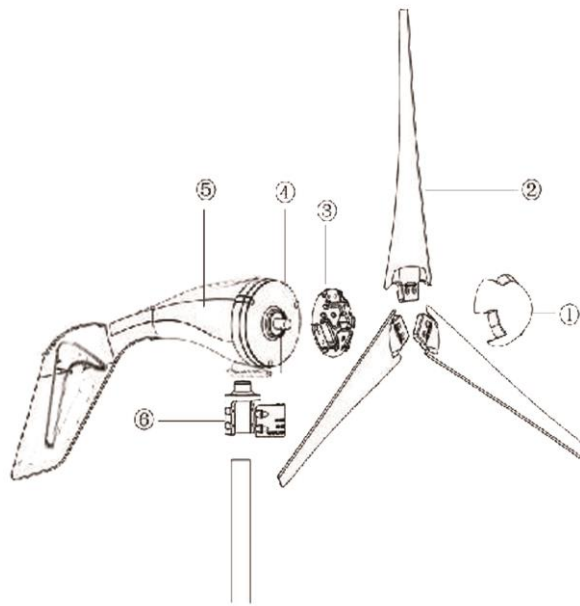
BODY ASSEMBLY EXPLODED VIEW
